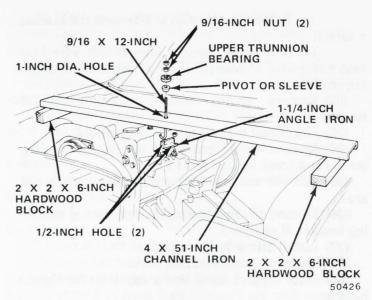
B-70 Engine Holding Fixture—Typical (Pacer shown)
